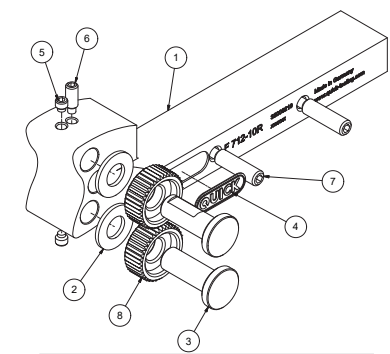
F712-LD exploded drawing (Swiss-type lathe variant)
